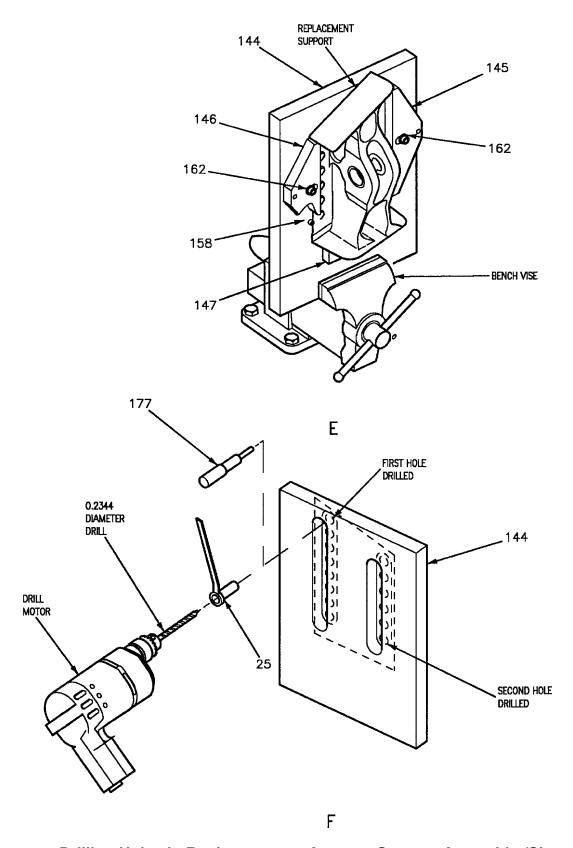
Drilling Holes in Replacement 74A110964 Support Assembly (Sheet 3)
